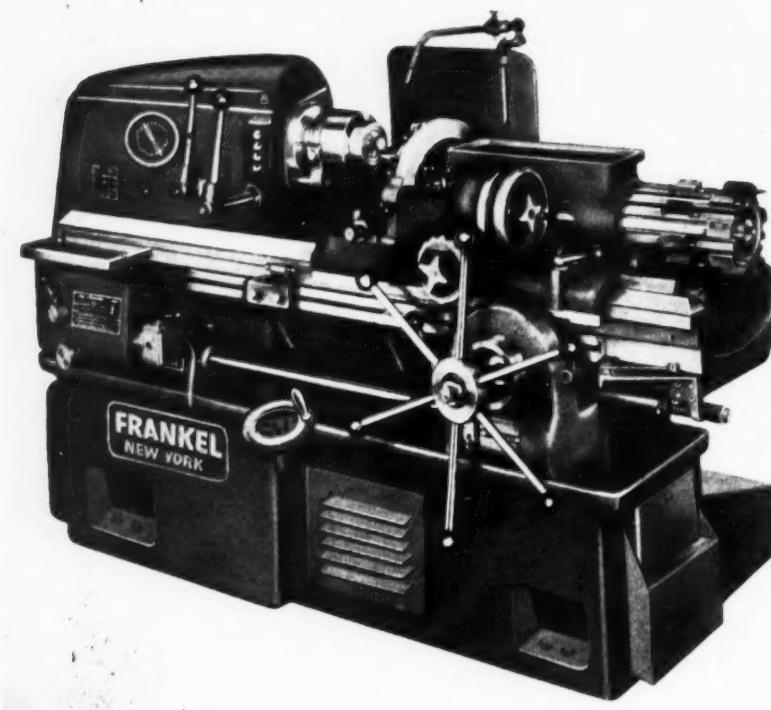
Single-spindle Semi-automatic Lathe with Horizontal Tool-head on which Multiple Tool-plates can be Quickly Interchanged
